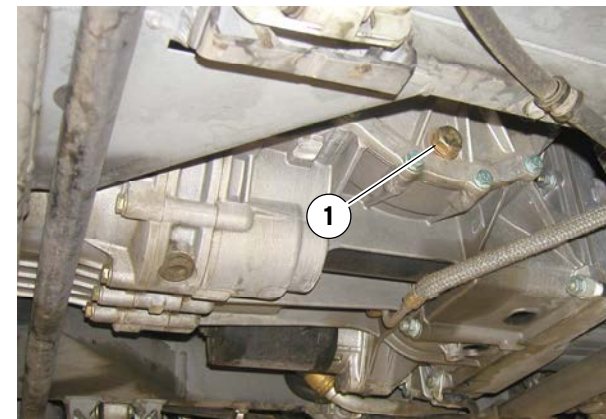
Plug for checking the level of the transmission and rear differential oil
